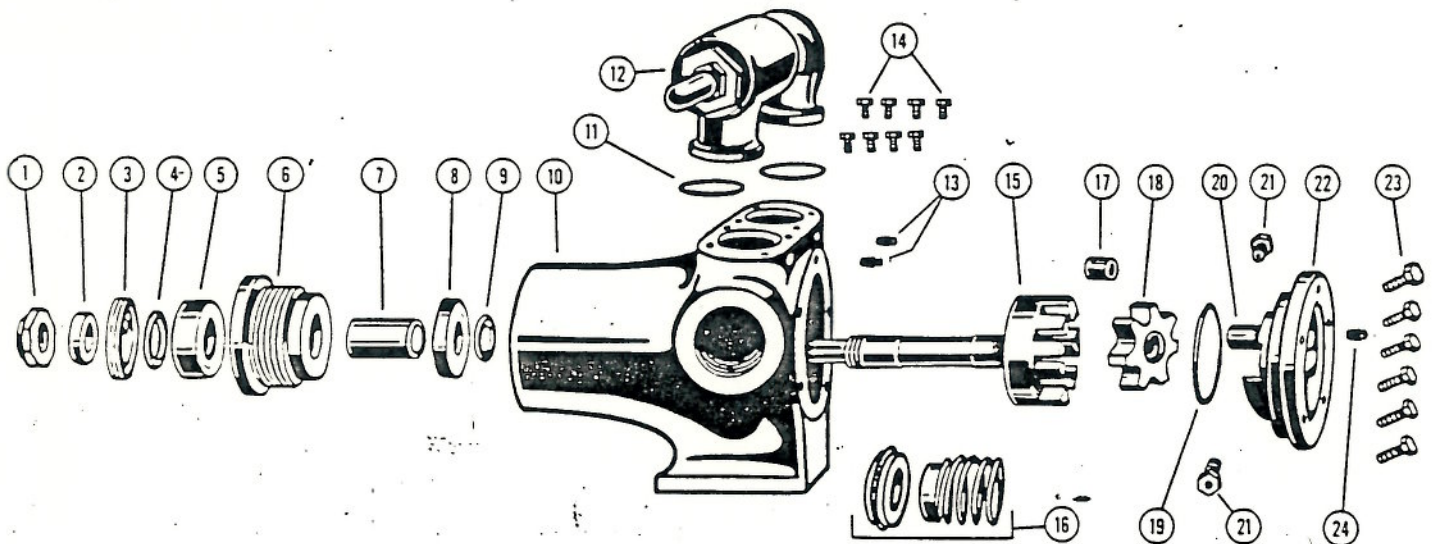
EXPLODED VIEW AS, AK, AL195 PUMPS
